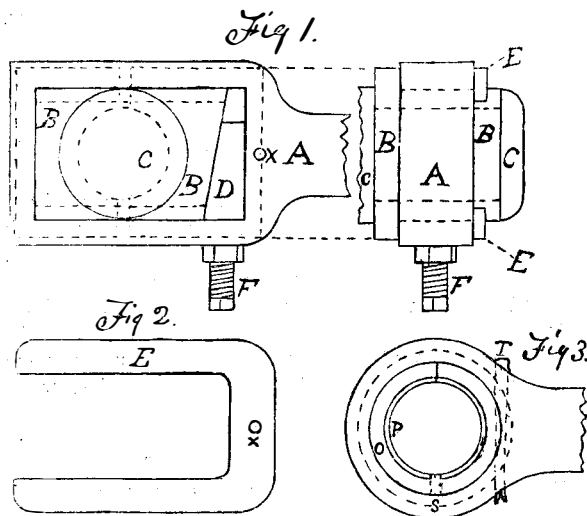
shows a good substantial form for the ends of parallel rods; the outer ring, O, must be large enough to let the collar of the wrist pass easily through the eye in the rod; the ring, P, is simply a lining of hard composition, to take the wear of the wrist and to be renewed occasionally when worn out; the outer ring being secured by a taper pin, T, split at its lower end as shown. The inner ring is kept from turning by a dowel, S. The rings, being in halves, may be first placed upon the wrist, and then the rod slipped upon them, as explained above. F. G. WOODWARD.
